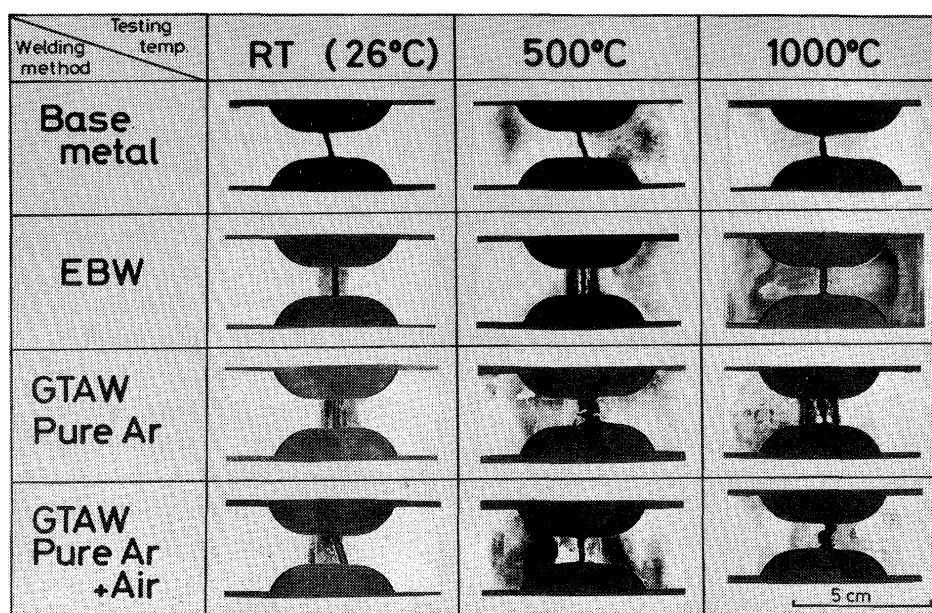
General appearance of hot tension-tested specimen of EB and GTA welds of EB-Mo(40C)
